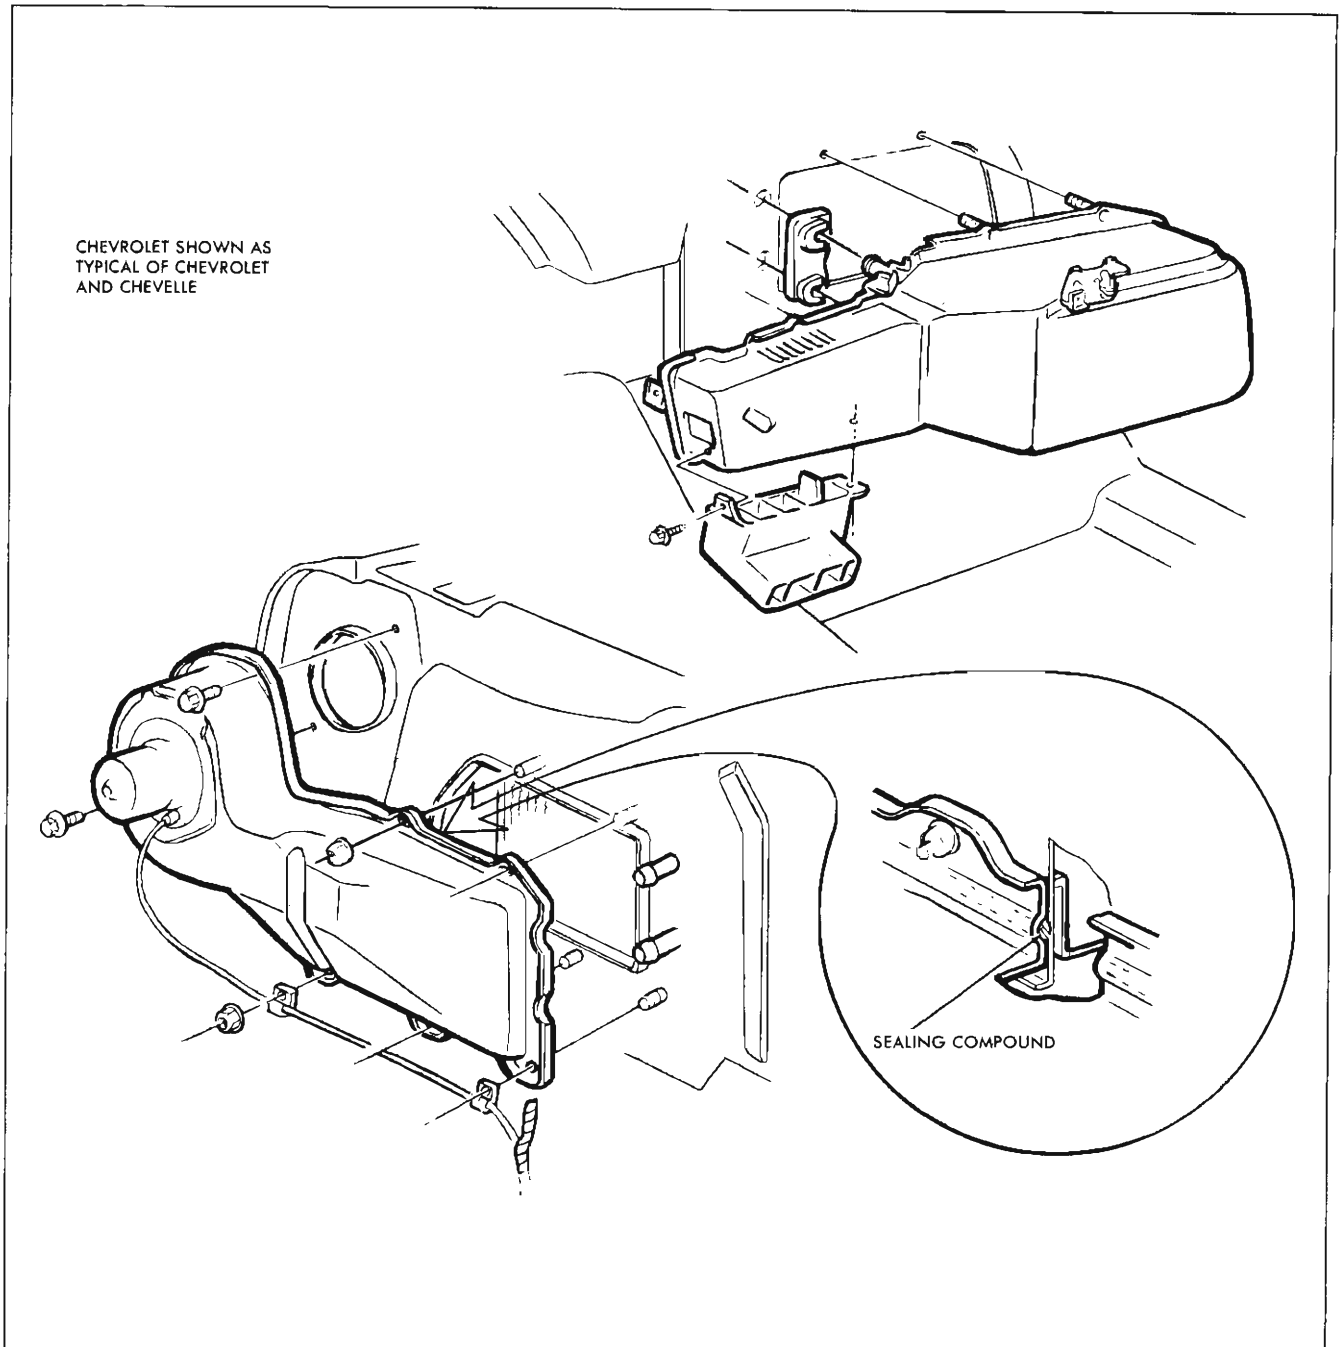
Heater Blower and Air Inlet Assembly and Floor Distributor
